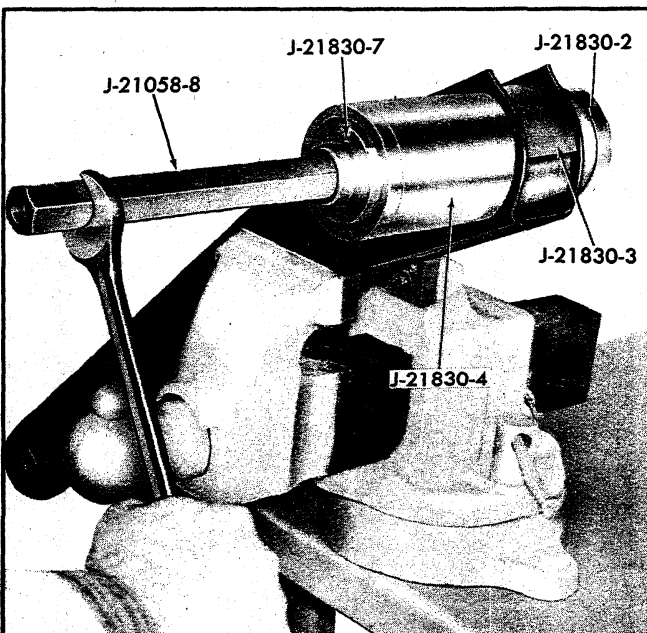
Lower Control Arm Rear Bushing Removal (Chevrolet)
